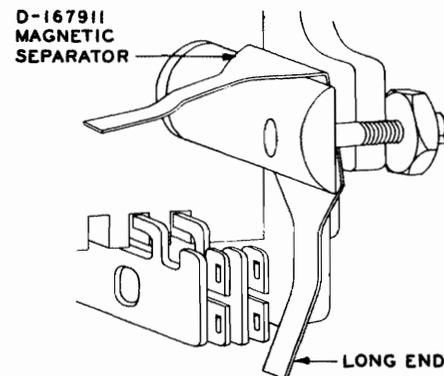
Method of Inserting D-167911 Magnetic Separator in Armature Gap
